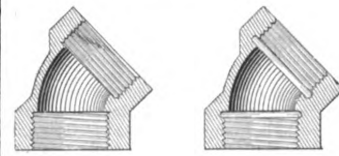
Improved Fitting with Thread Full to Inside. Fig. 10.—Old Style of Fitting with Recess at Inside End of Thread.
